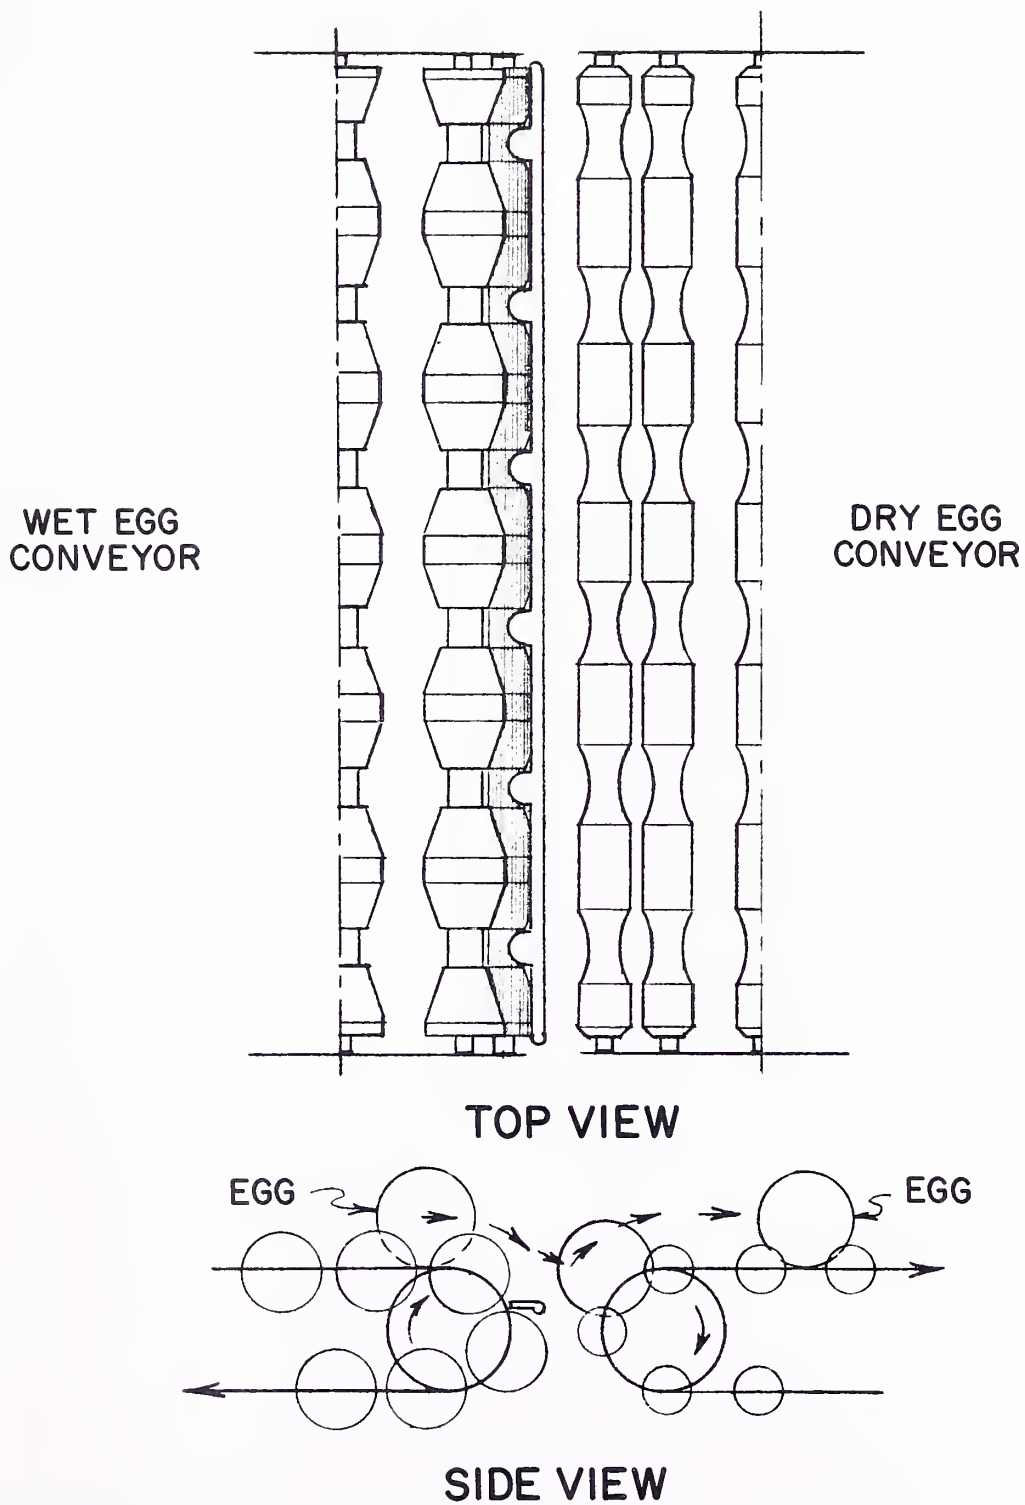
Schematic drawing of a mechanical transfer device that moves eggs from the wet conveyor to the dry conveyor.
